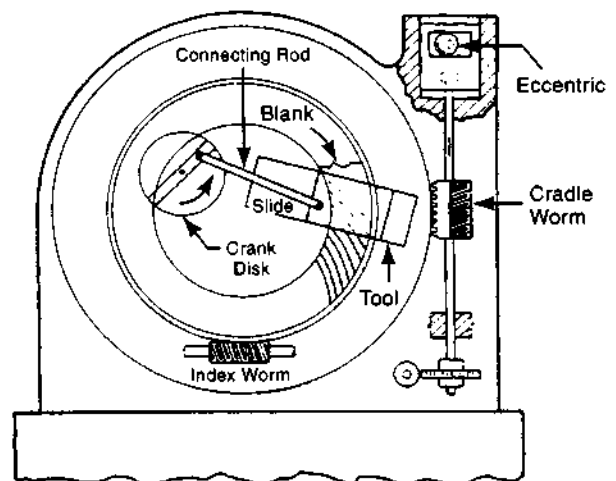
Spiral gear-planing generator cutting (from D.W. Dudley, *Gear Handbook*, McGraw-Hill, New York.)
